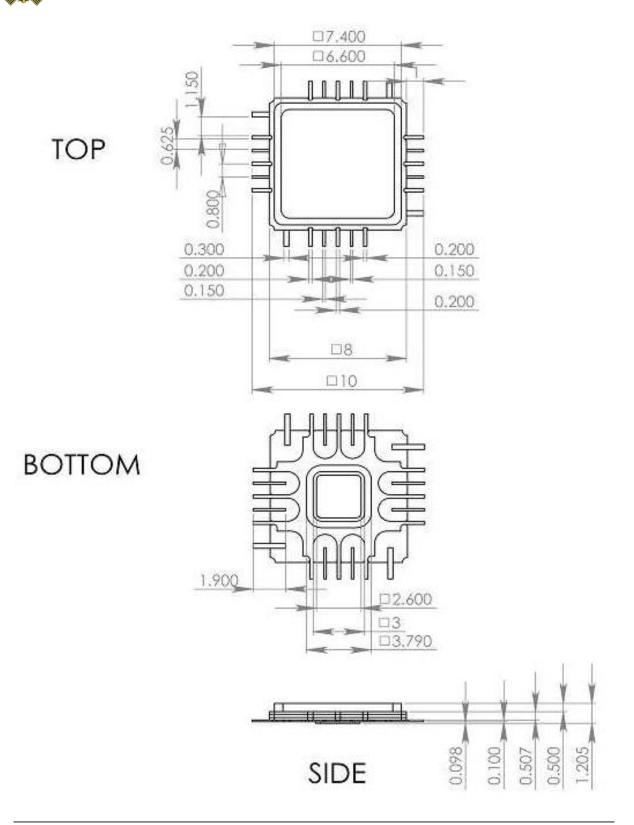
CQFP 24-Pin Package Drawing (All Dimensions in mm)
